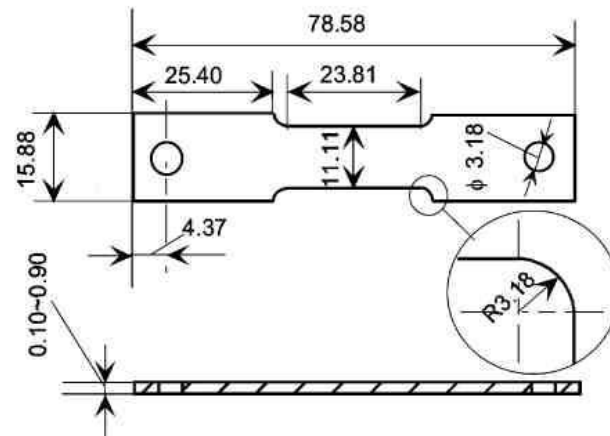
Sheet sample used for stressed foil penetration experiments, all dimensions in mm.
